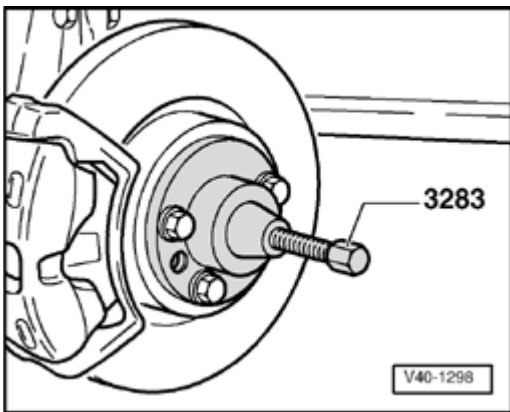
Pressing Out Drive Shaft Using Special Tool 3283
